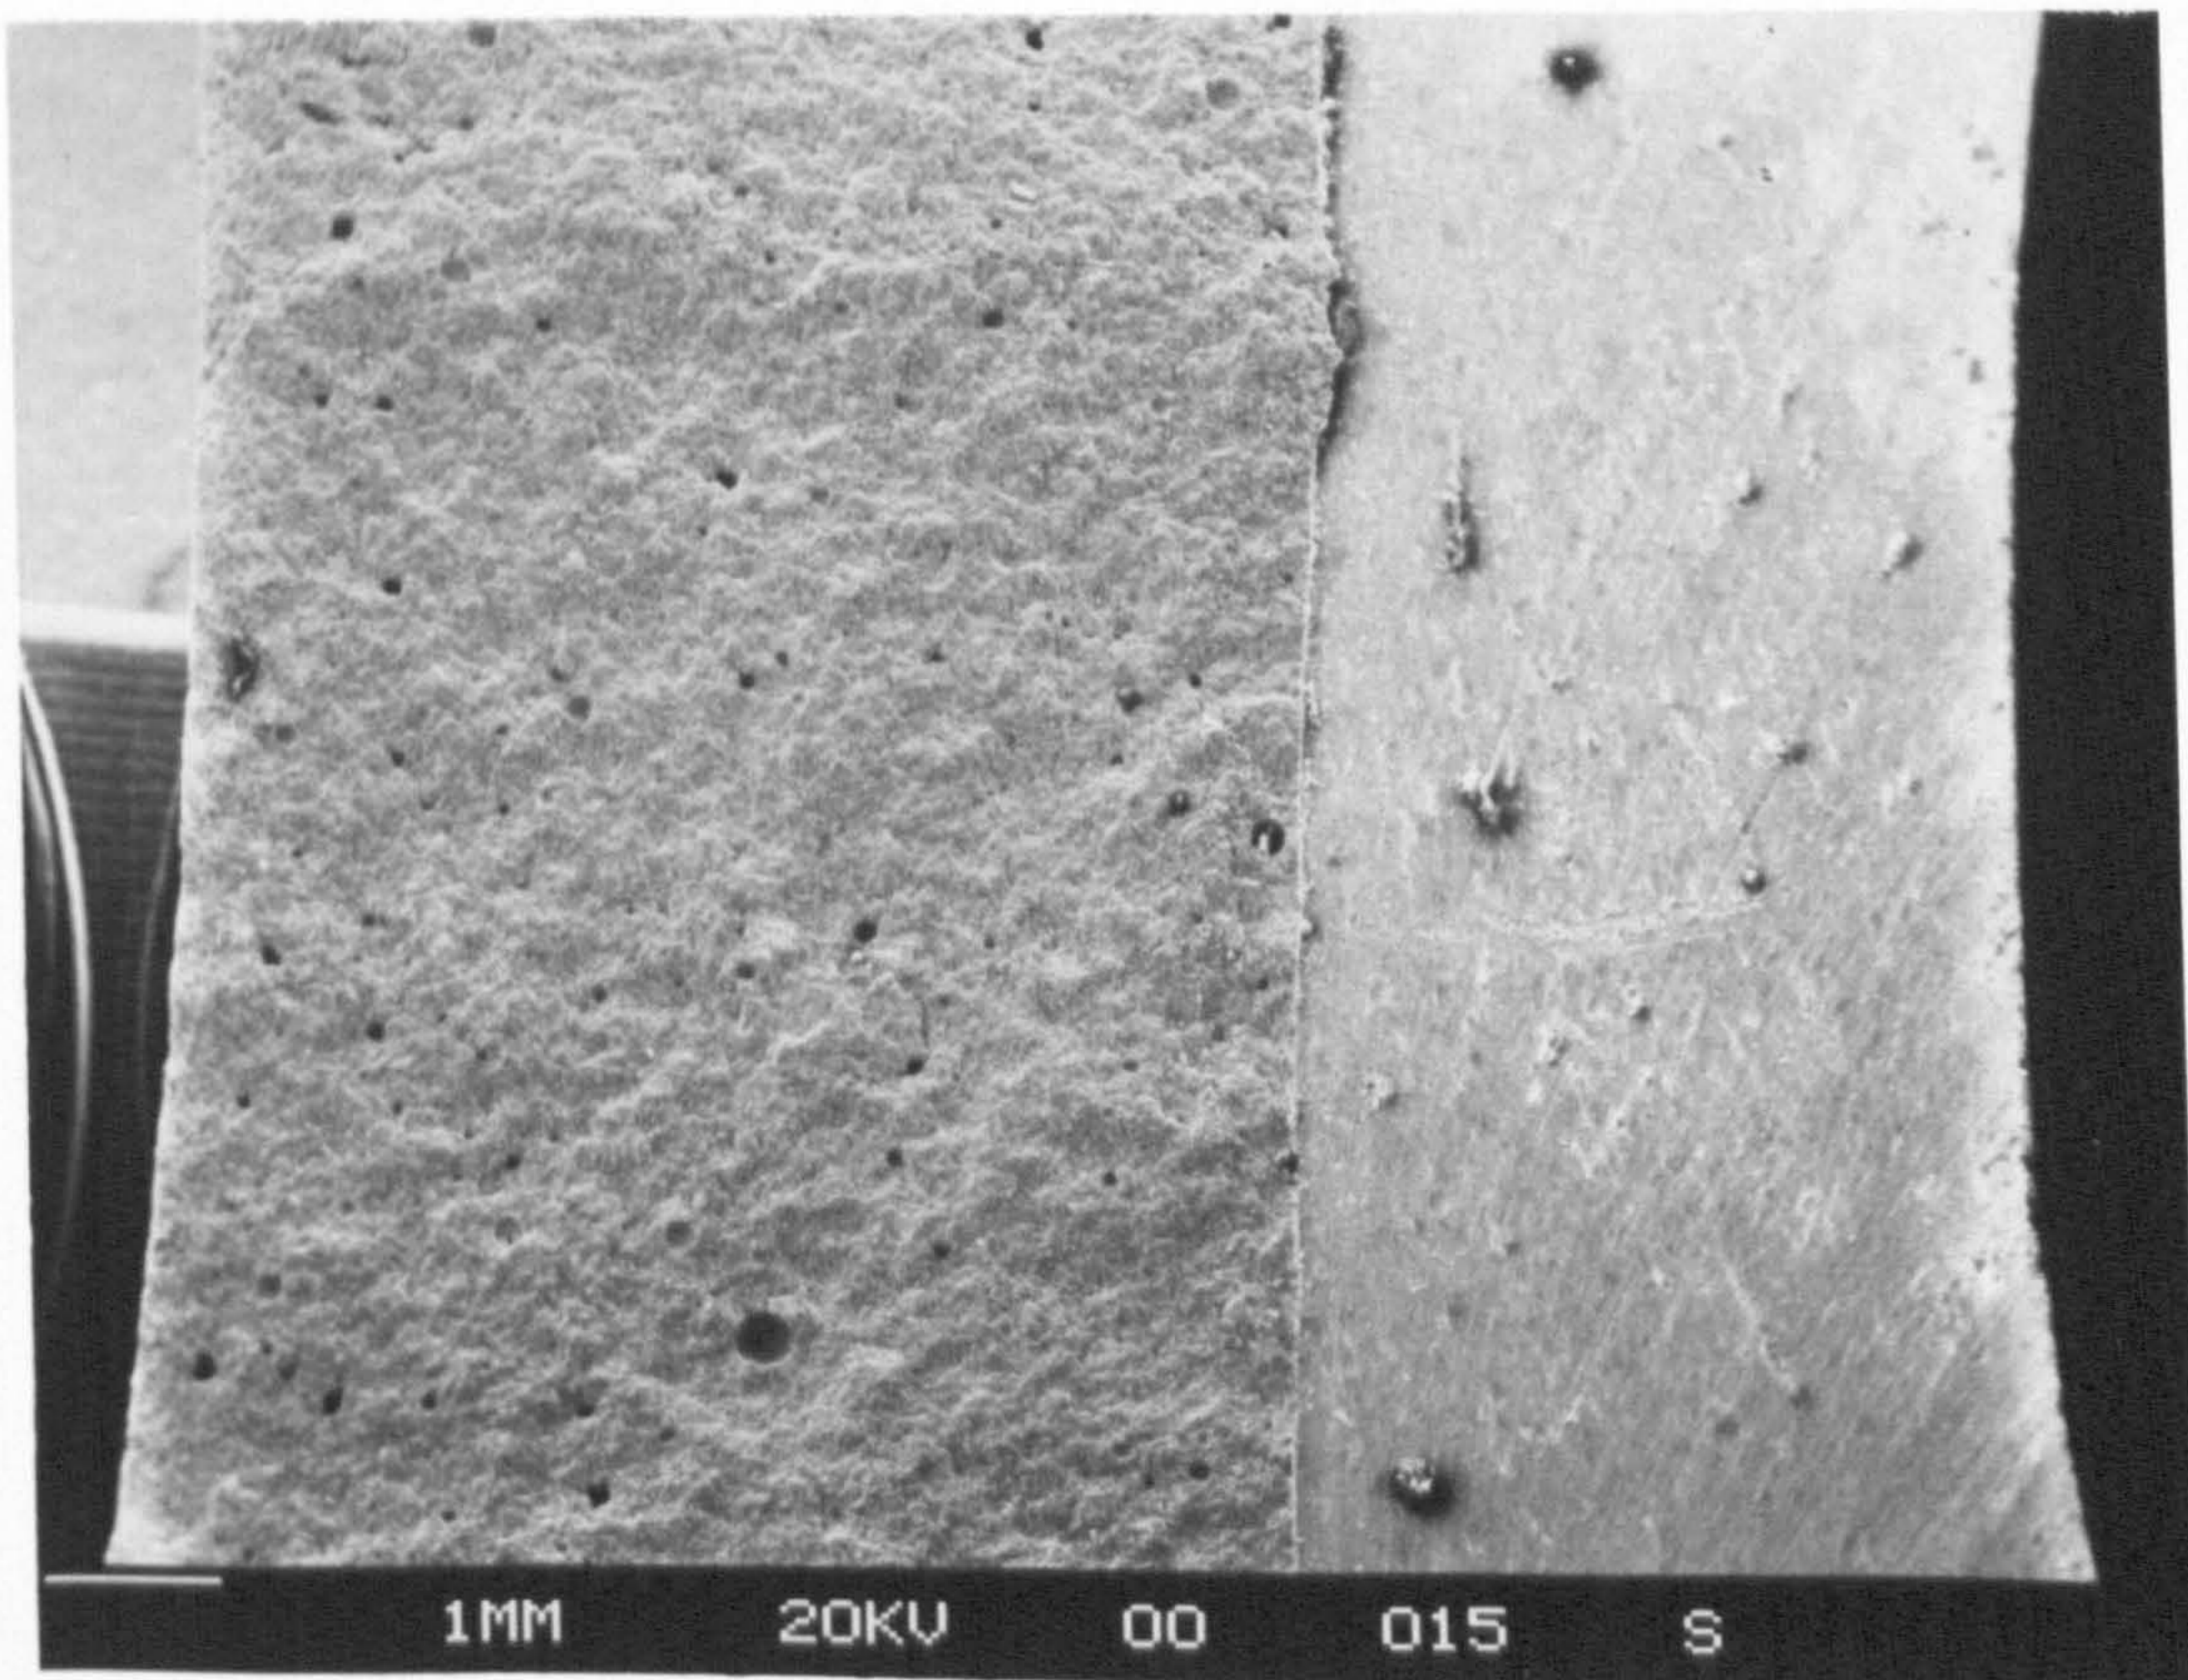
TYPICAL FRACTURE SURFACE SHOWING A POROSITY STRUCTURE x 9
